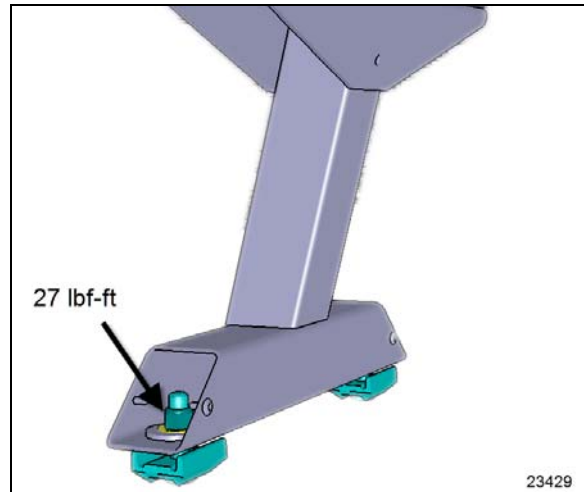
SEAT PEDESTAL ASSEMBLY
